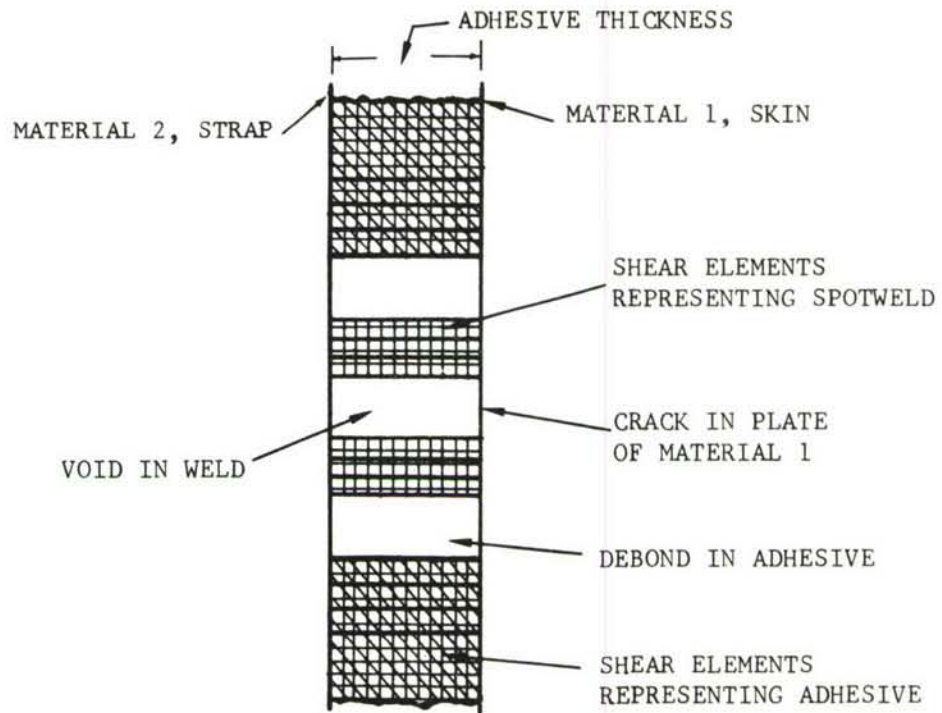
Modeling of Weldbonded Structure Showing Shear Elements Representing Spotwelds and Adhesive
